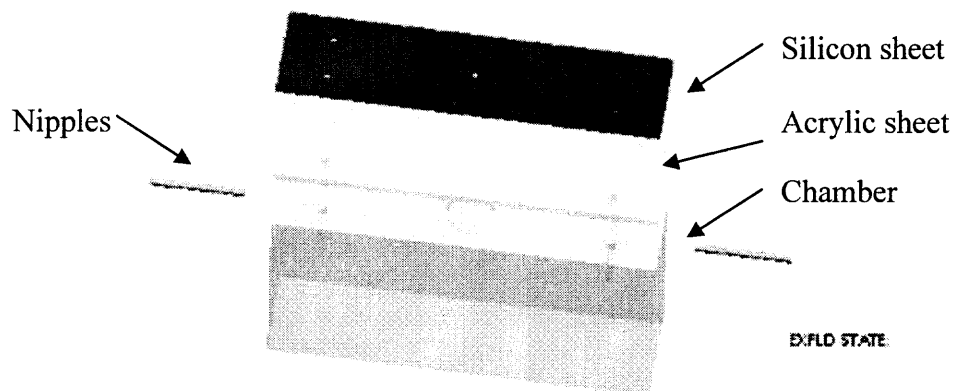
Exploded View of Setup for *In vitro* testing of Polycarbonate Casing 20MHz Transducer Design – 2
